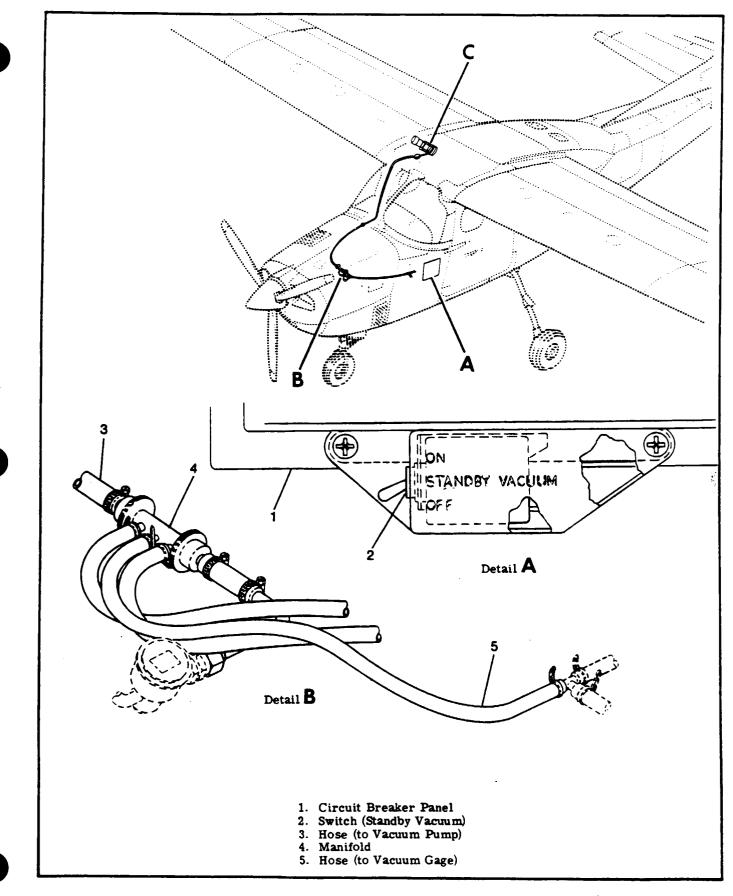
Standby Vacuum System (Sheet 1 of 2)
